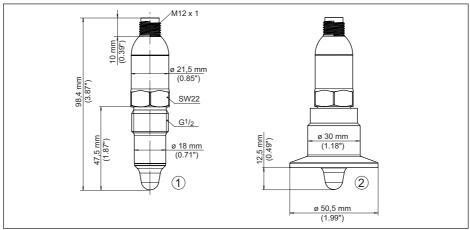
VEGAPOINT 11, hygienic version - Thread
